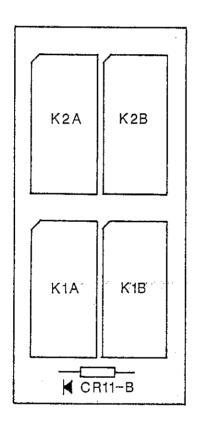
Relay Adapter Assembly A1. Parts Location Diagram
